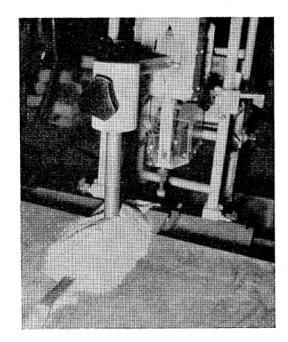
Deck longitudinal welding using multi c.e.s. welding (showing the welding equipment placed on upper deck, welding simultaneously several deck longitudinals under upper deck plate).
